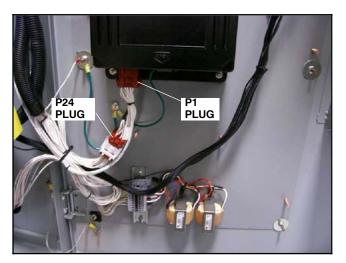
Conversion Kit Harness Connection to Controller Assembly
